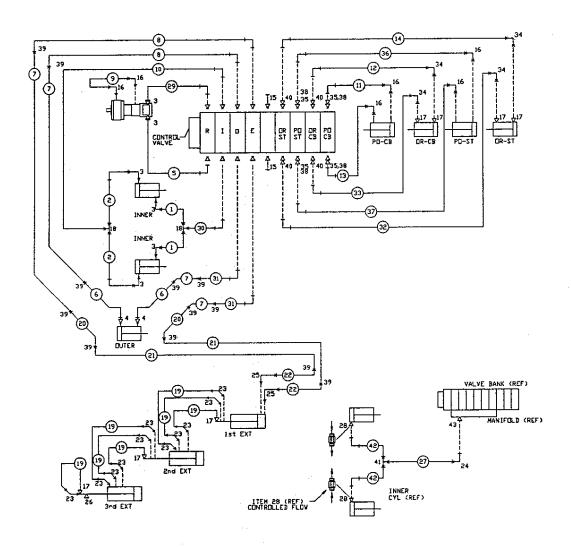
A. HYDRAULIC KIT - 3 HYDRAULIC EXTENSIONS (91710352)
